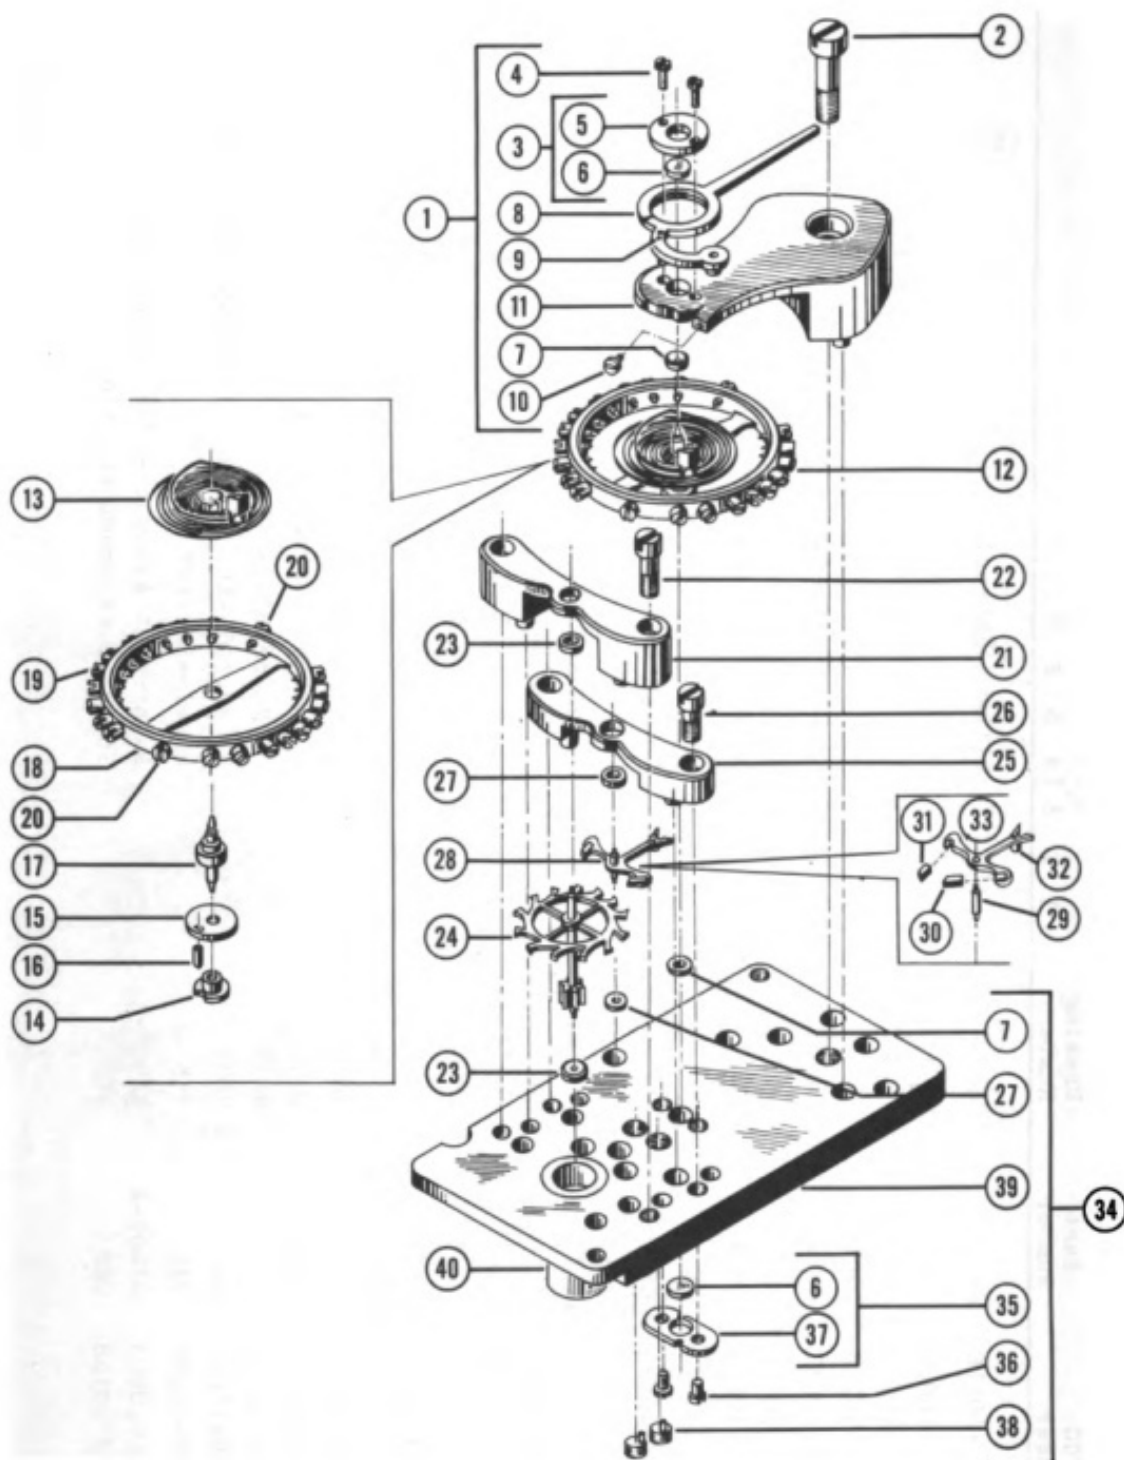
Chelsea No. 17E Boat and Deck Clock Escapement Assembly, No. 22—
